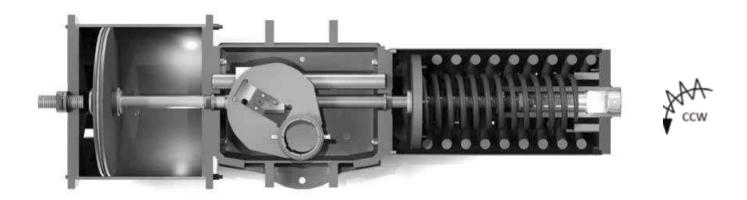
Single Acting Actuator Configuration: Fail Open – Fail Counter Clockwise
